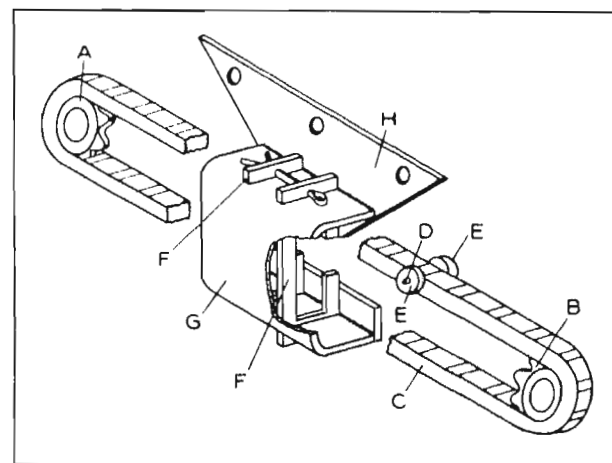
Roller chain imparts reciprocating driving motion to machine slide (not shown). Rollers *E* engage follower-plates *F* which carry slide bracket *H* with them in both directions of travel.
